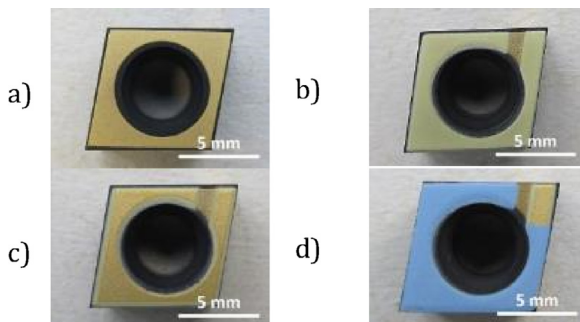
Fabrication steps of the sensor element. (a) Au bottom electrode; (b) PZT thick film; (c) Au top electrode; (d) passivation layer.
